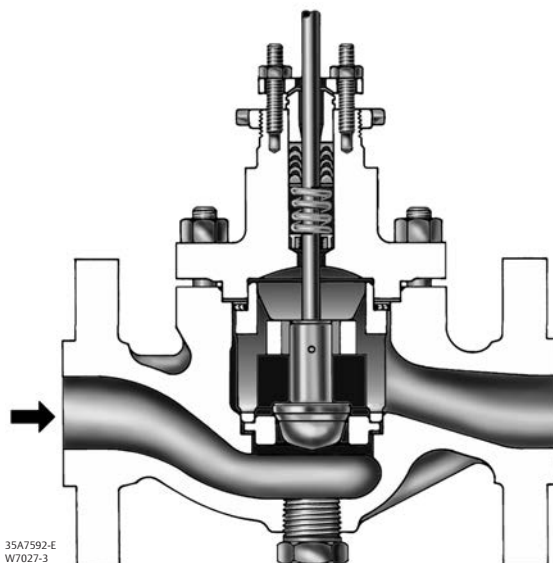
Single-Ported Globe-Style Valve Body
